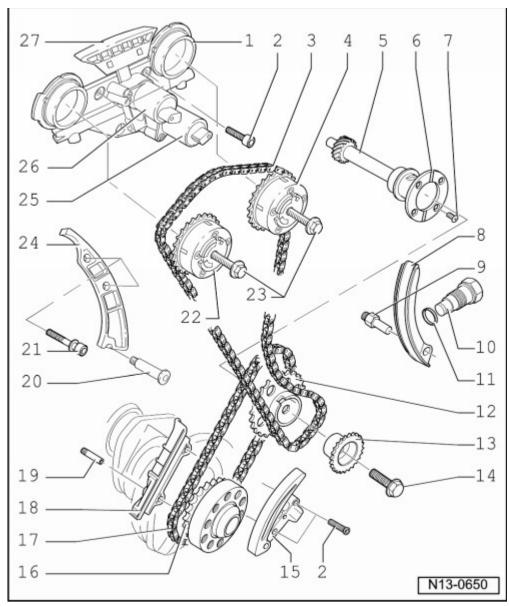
Chain Drive, Assembly Overview Courtesy of AUDI OF AMERICA, LLC
